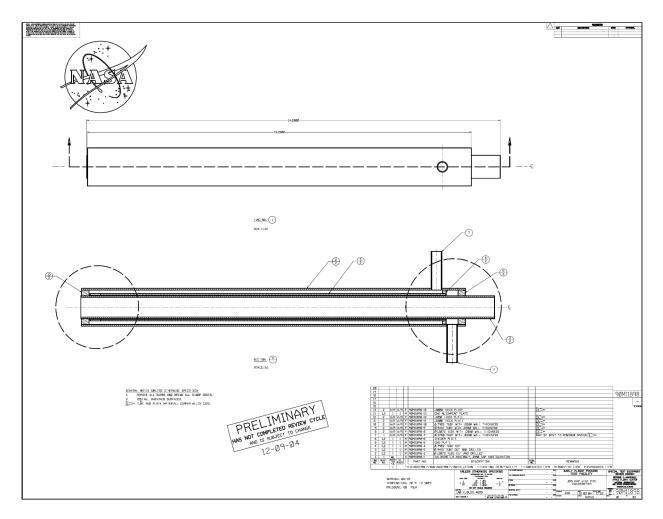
Heat pipe calorimeter assembly (Dwg. No. 90M11898).
